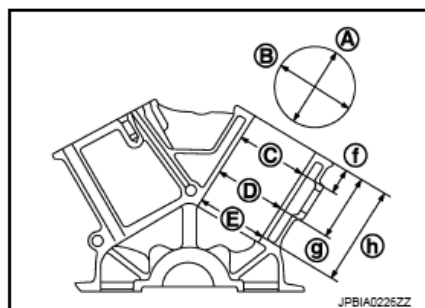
Identifying Cylinder Bore Clearances Measurement Points
